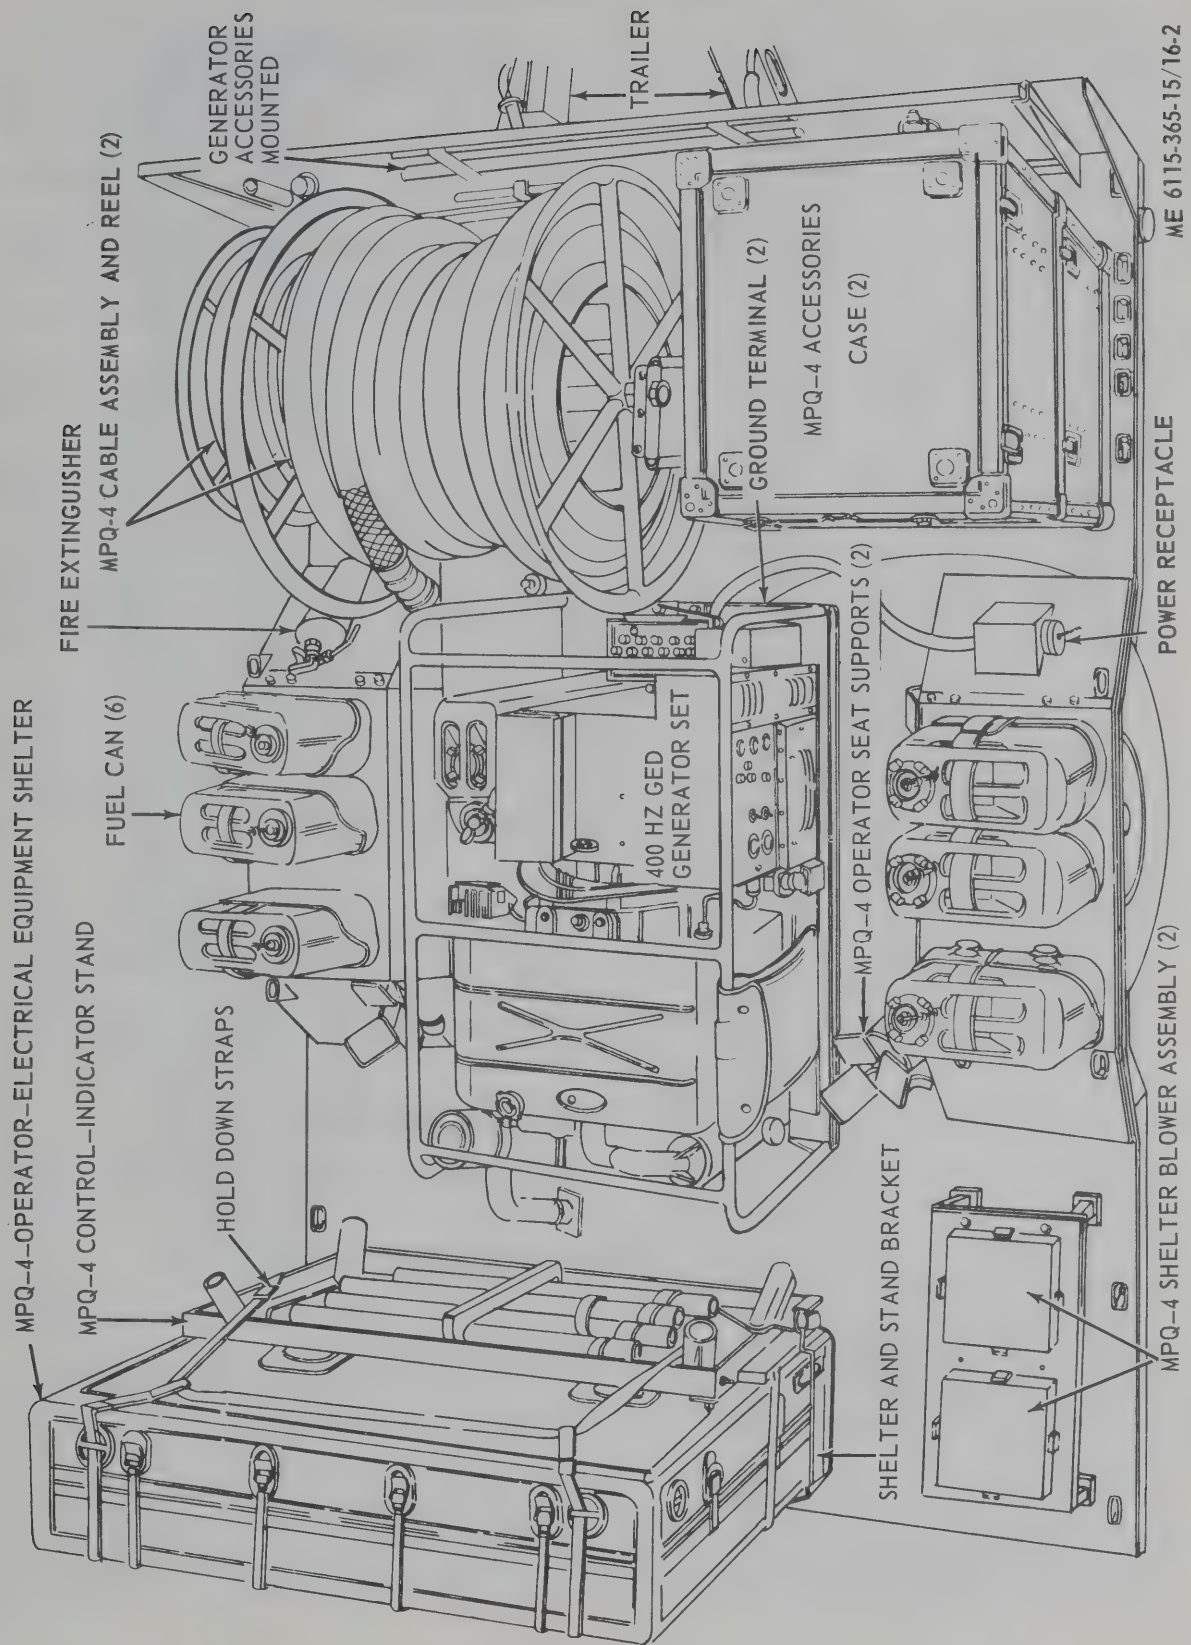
PU-804C/MPQ-4 overall view showing radar equipment stowed.
